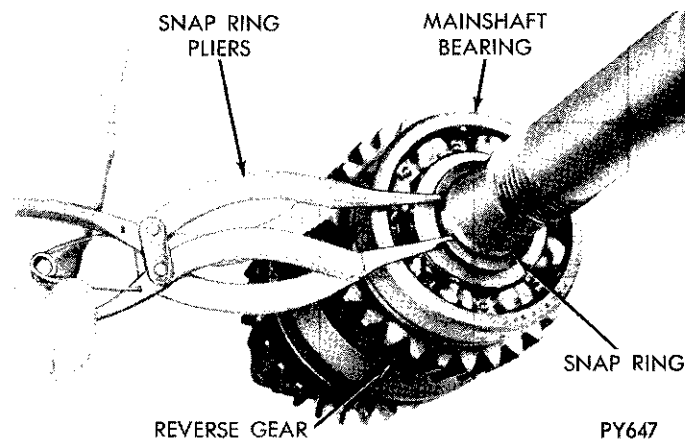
Snap Ring—Mainshaft Bearing to Shaft—Removal or Installation
